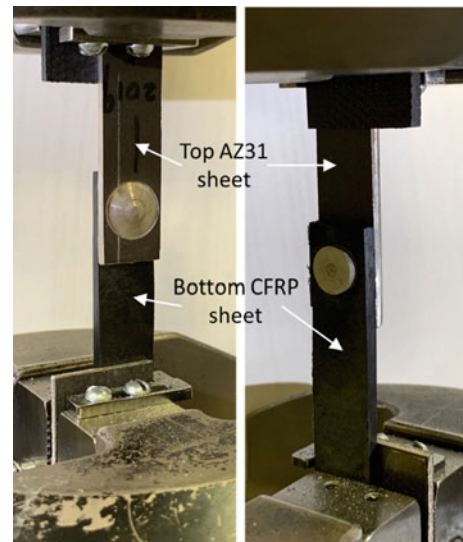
Picture of lap shear tensile test configuration of AZ31/CFRP with AZ31 insert
